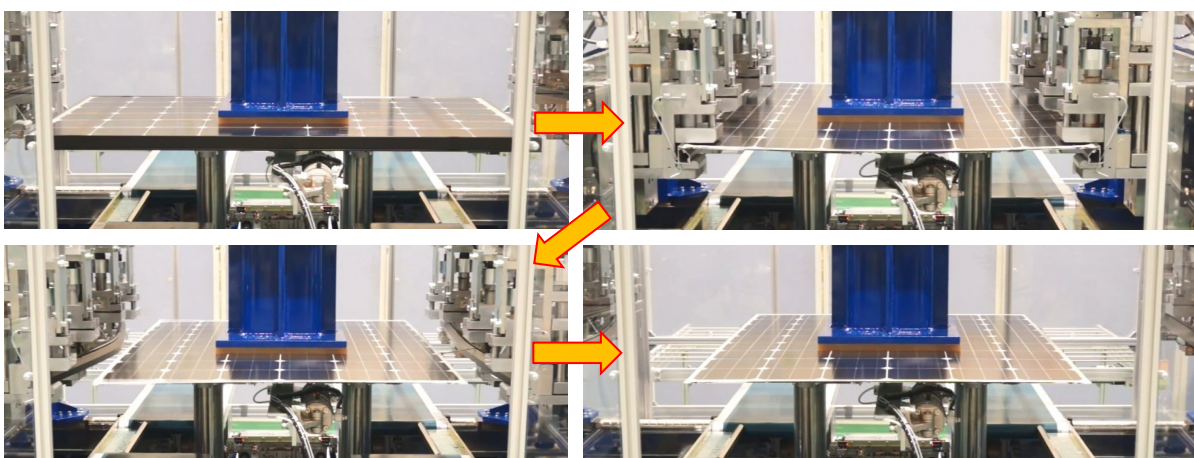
Removal process of aluminium frames (Photo courtesy of NPC Incorporated)
